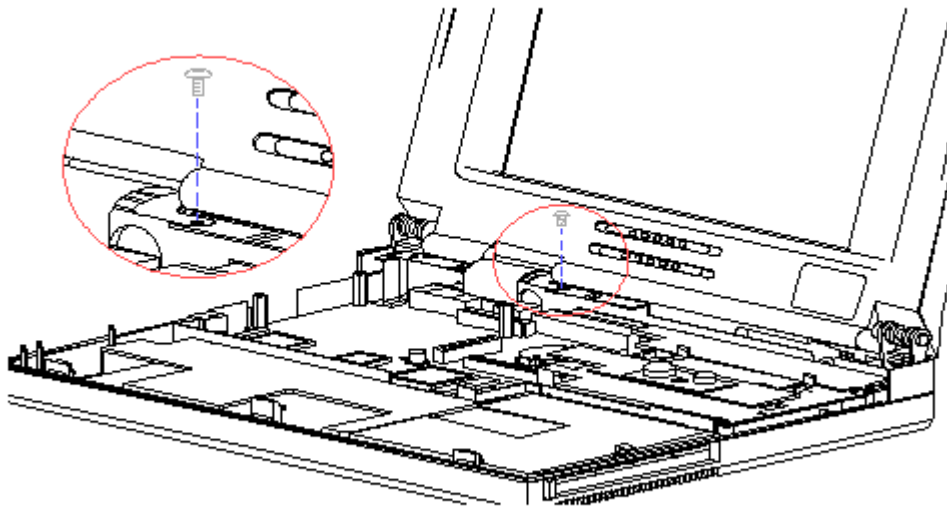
Removing Flex Cable Ground Strap from System Chassis
